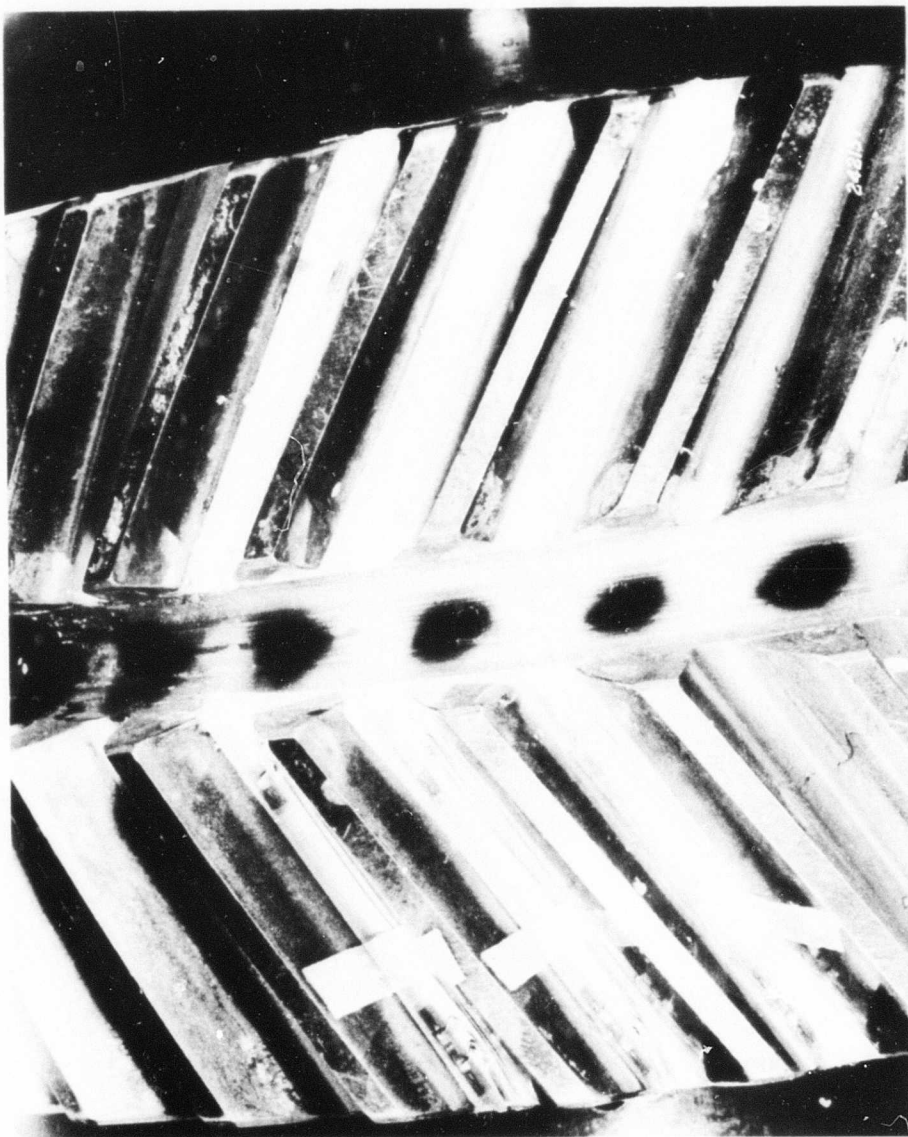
Strain Gages Located on Pinion Shaft Gear Tooth.
